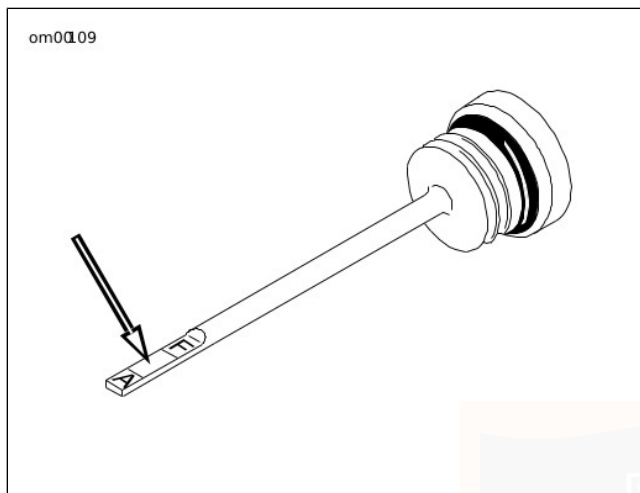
Transmission Filler Plug/Dipstick Lubricant Level
